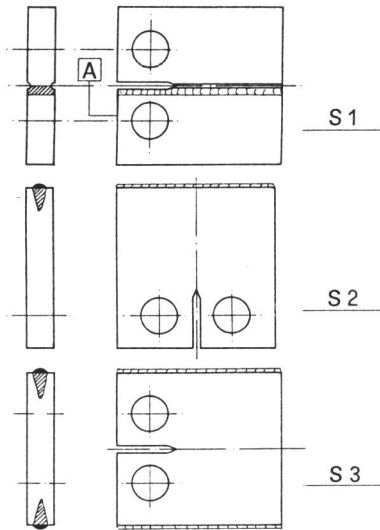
Adopted welding geometries for CT specimens.
